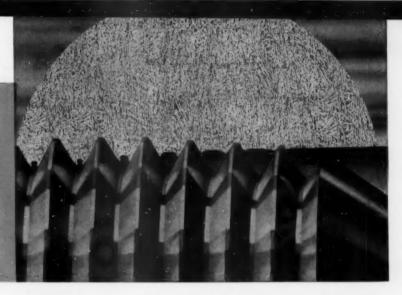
Photomicrograph of a rolled thread in a leaded steel part. The upset grain pattern on the thread flank illustrates the effect of cold working on the surface and top of the thread. A stronger thread is obtained with fewer surface defects and smoother flanks to make subsequent assembly operations easier with fewer rejections for defective threads.
